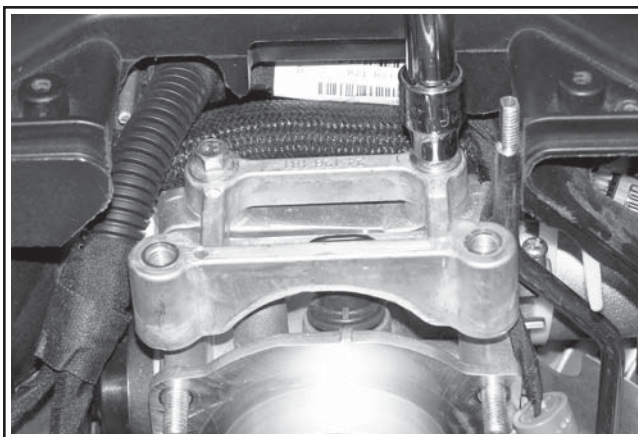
Disconnecting the Throttle Position Sensor.
